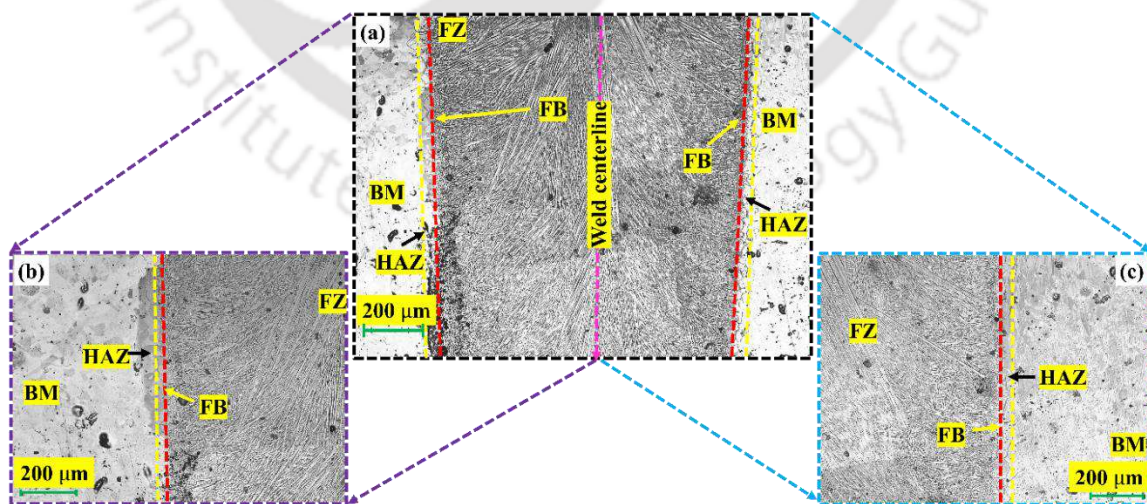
(a-c) Top view of the weld joint illustrating fusion zone, fusion boundary, and heat-affected zone for the HI_{35.80} weld joint.
